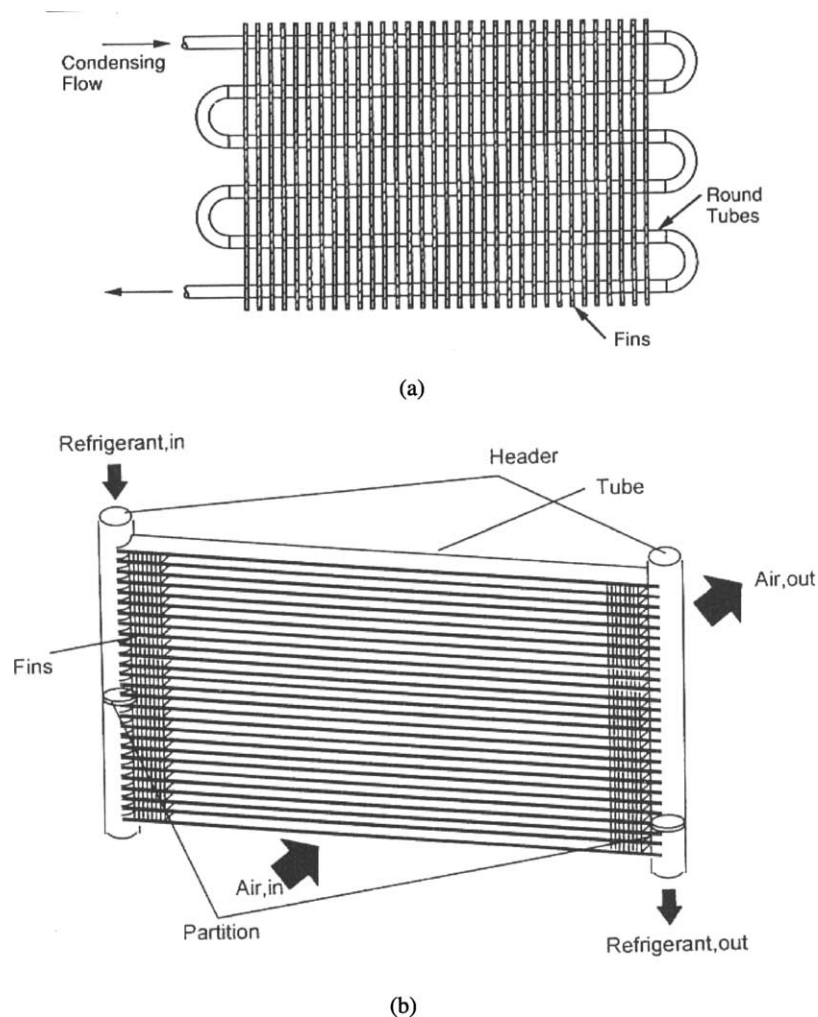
Fin-and-tube and brazed aluminum microchannel condensers. (a) Serpentine circuited round-tube condenser, (b) parallel flow brazed aluminum automotive air-cooled condenser.
